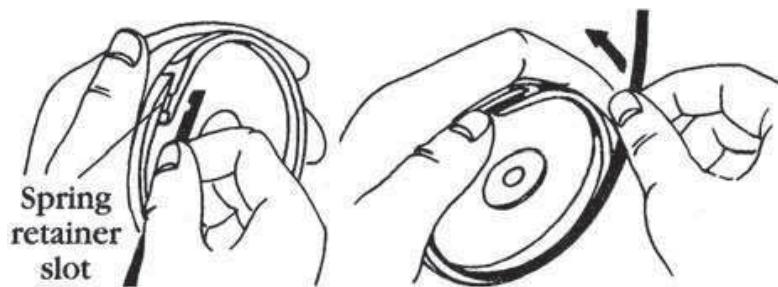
Remove the anchor bolt and spring. Briggs & Stratton Corp.
